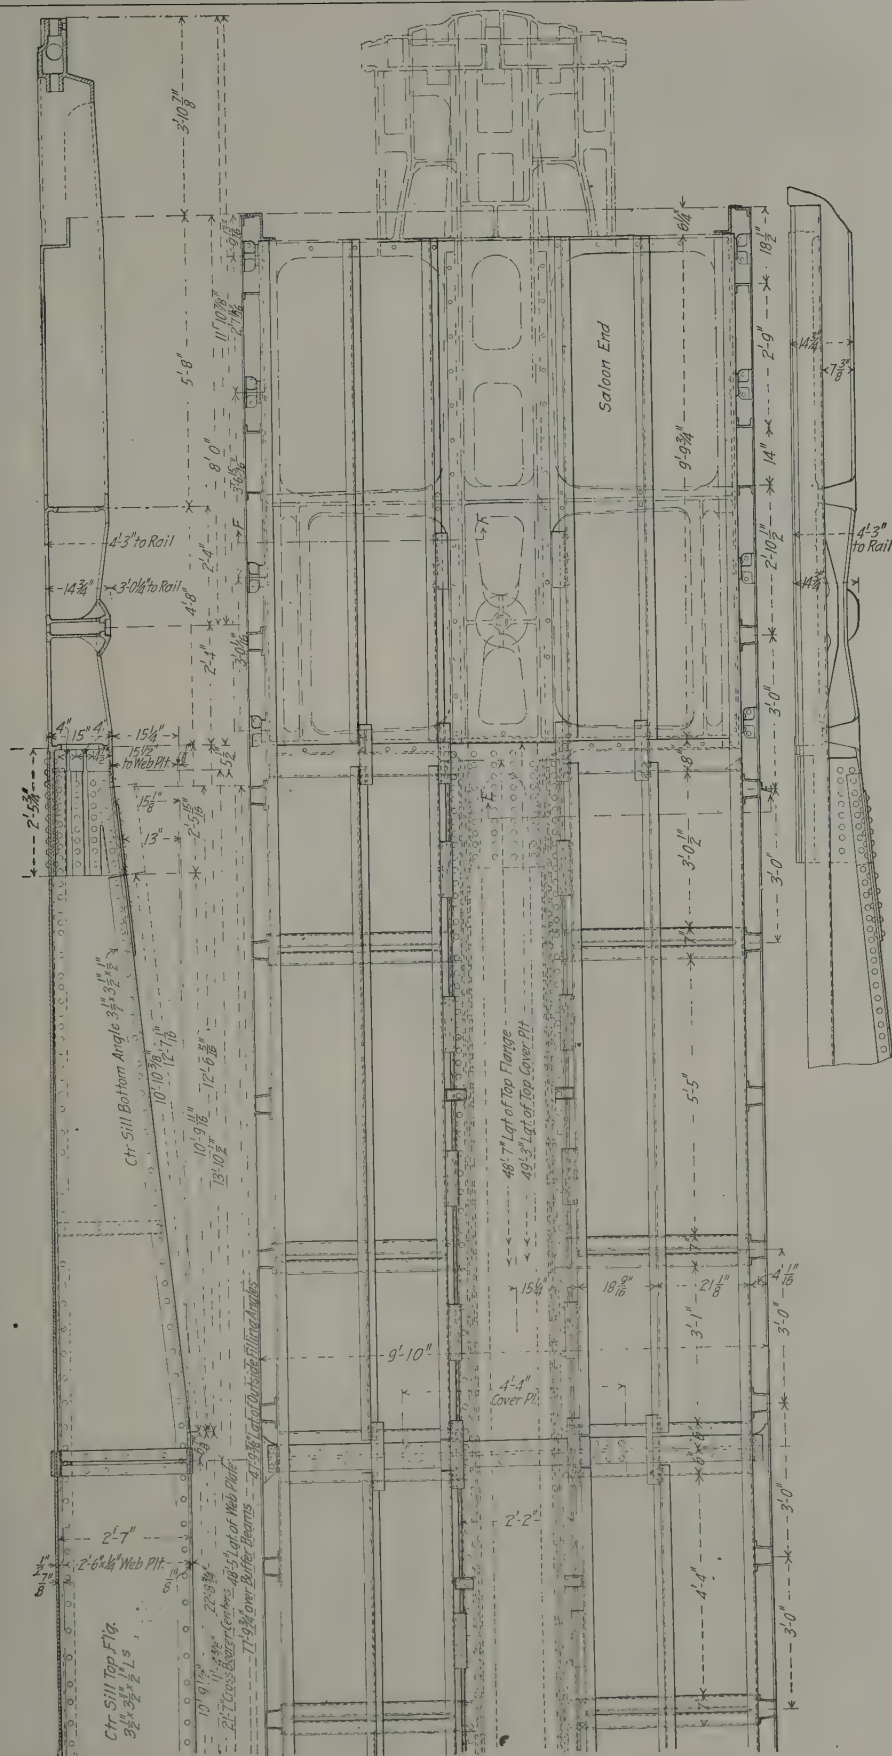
Underframe of New York Central Steel Day Coach Shown in Fig. 488. Builder, American Car & Foundry Company.
